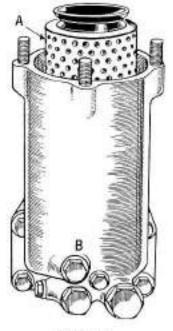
ENGINE OIL FILTER A. Element B. Drain Plug
